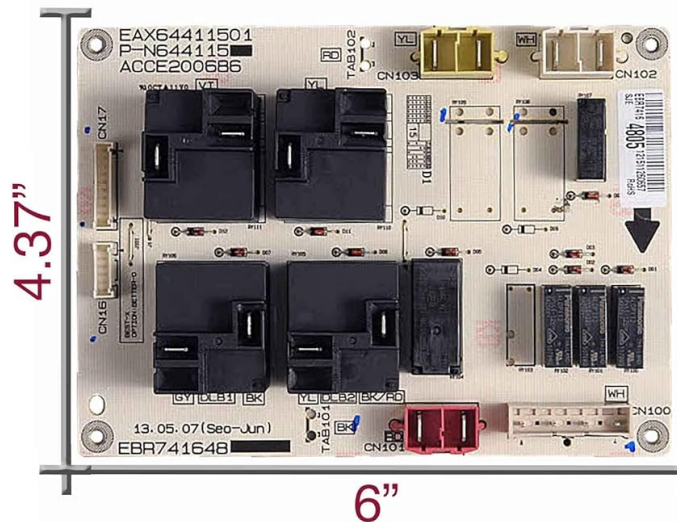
Dimensions of the LG EBR74164805 Relay Control Board: 6 inches length, 4.37 inches width, 1.25 inches height.
